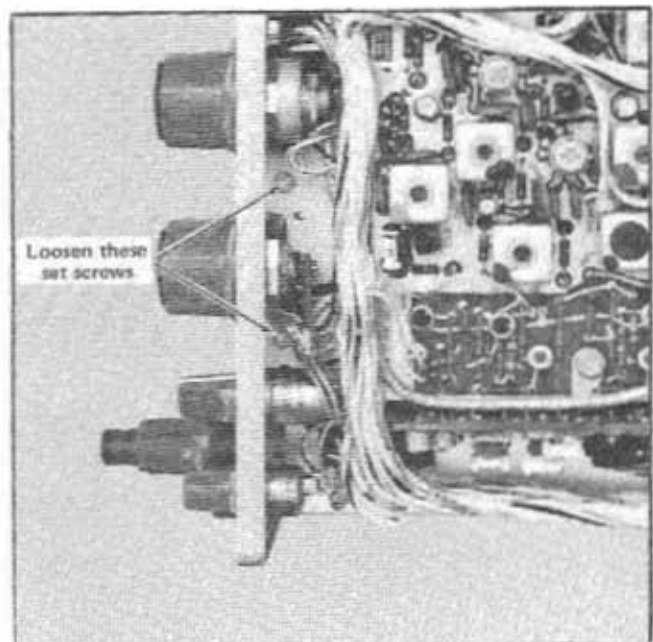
Location of the set screws holding the RF casting to the front panel.
